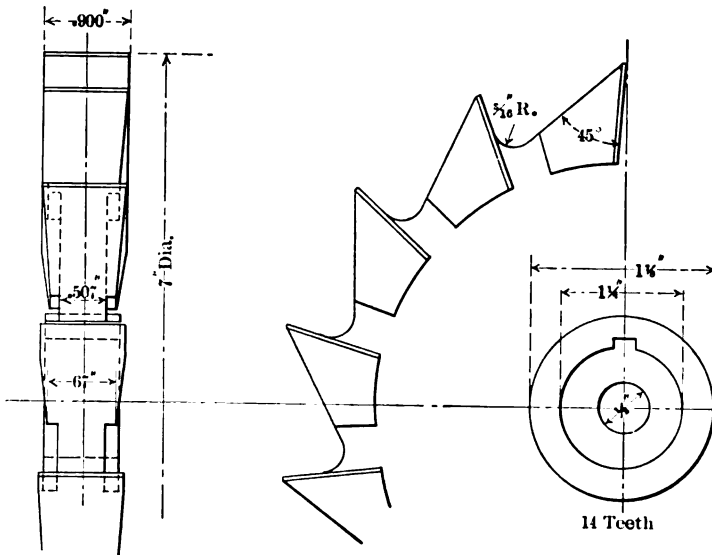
CUTTER USED ON HEAVY TYPE LINCOLN MILLING MACHINE
